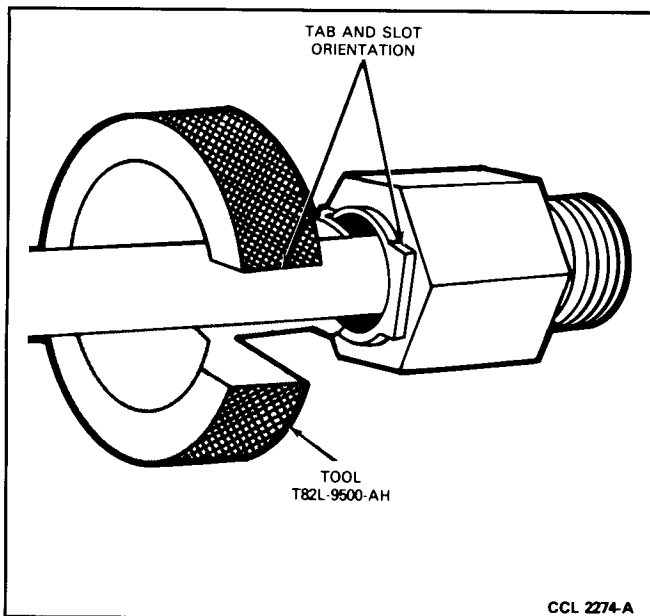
Oil Cooler Line Quick Connect Coupling Disconnect Tool
